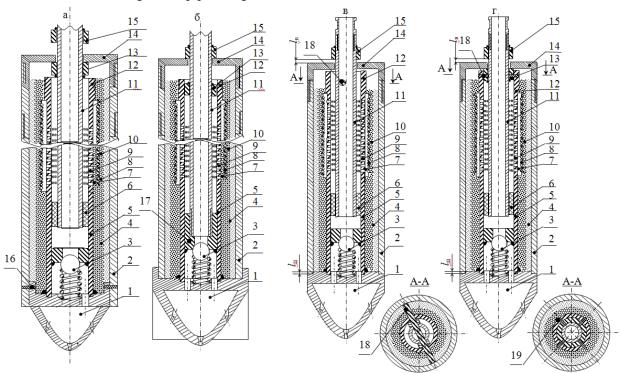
Diagram of a downhole gravel filter with a removable protective casing: a – with a rigid connection of the removable casing to the shoe using studs; b – with a left-hand thread connection between the drill string and the filter frame; c – with a T-shaped connection between the drill string and the over-filter pipe; d – with a rigid connection of the drill string to the over-filter pipe using studs; 1 – shoe; 2 – removable casing; 3 – check valve; 4 – outer layer of gravel pack material;
